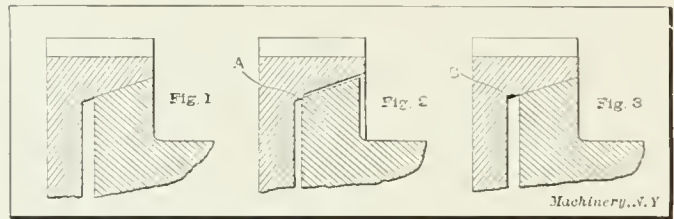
Clutch as shown by Mr. Kylin's Drawings. Fig. 2. Result of Wear on the Clutch shown in Fig. 1. Fig. 3. Clutch designed to compensate for Wear, by removing Triangular Ring B
